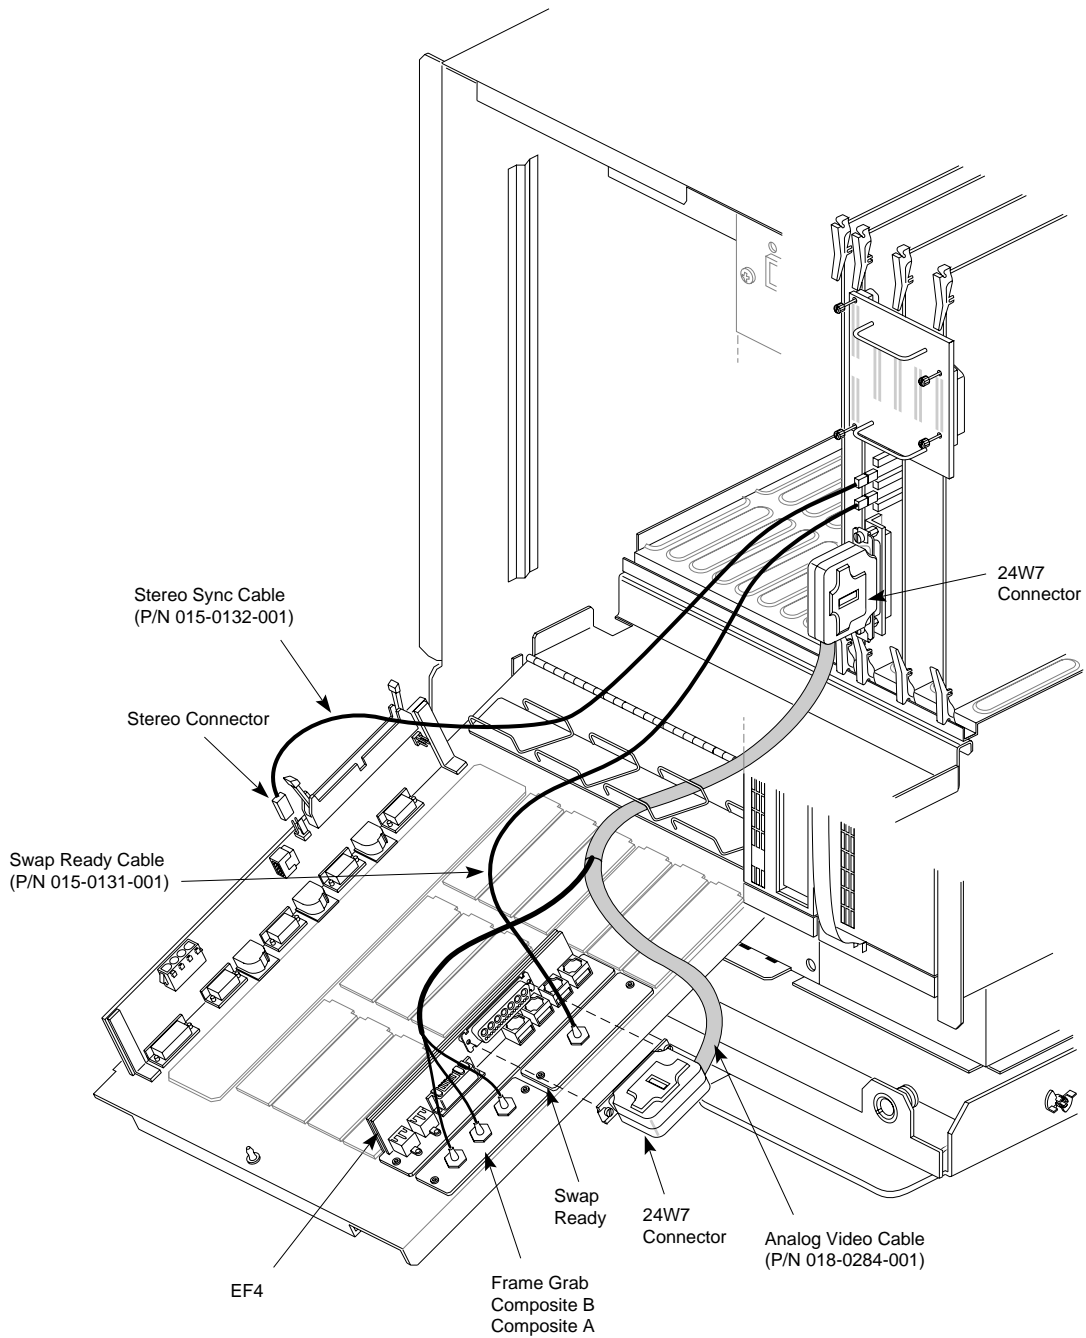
24W7 I/O Door Bracket Connection for RealityEngine
